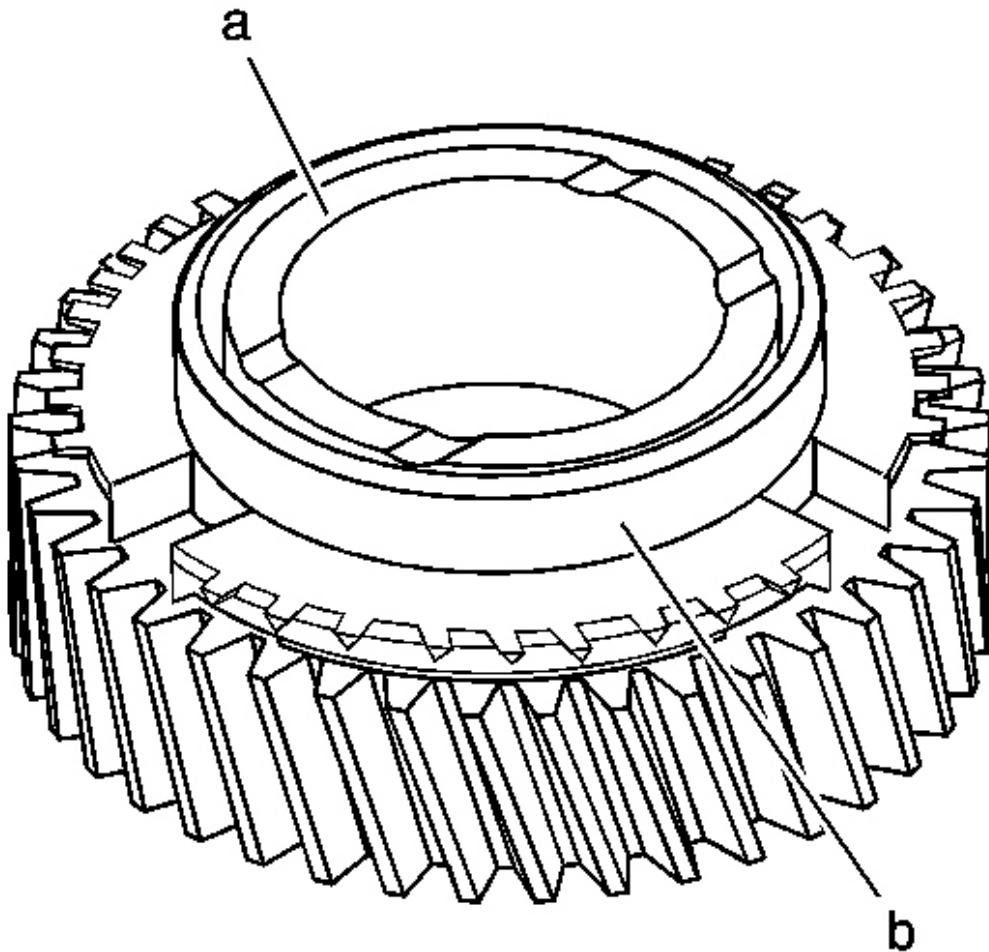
Inspecting Thrust Surfaces Of Gears
